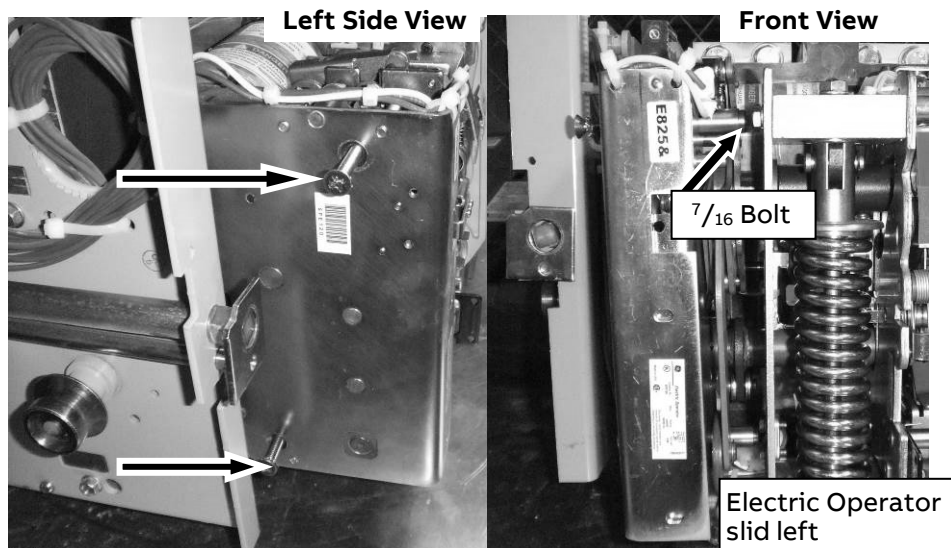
Electric Operator Slid Left on Draw-out Breaker after long Phillips screws unscrewed
